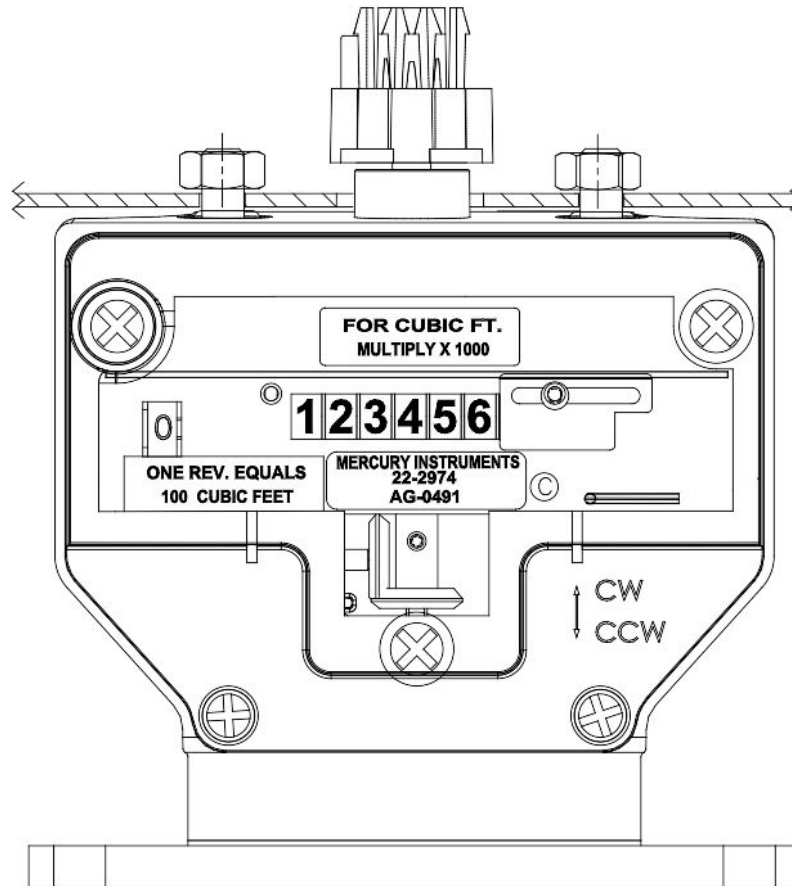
Integrated UMB Index Assembly / Ensemble index UMB intégré
